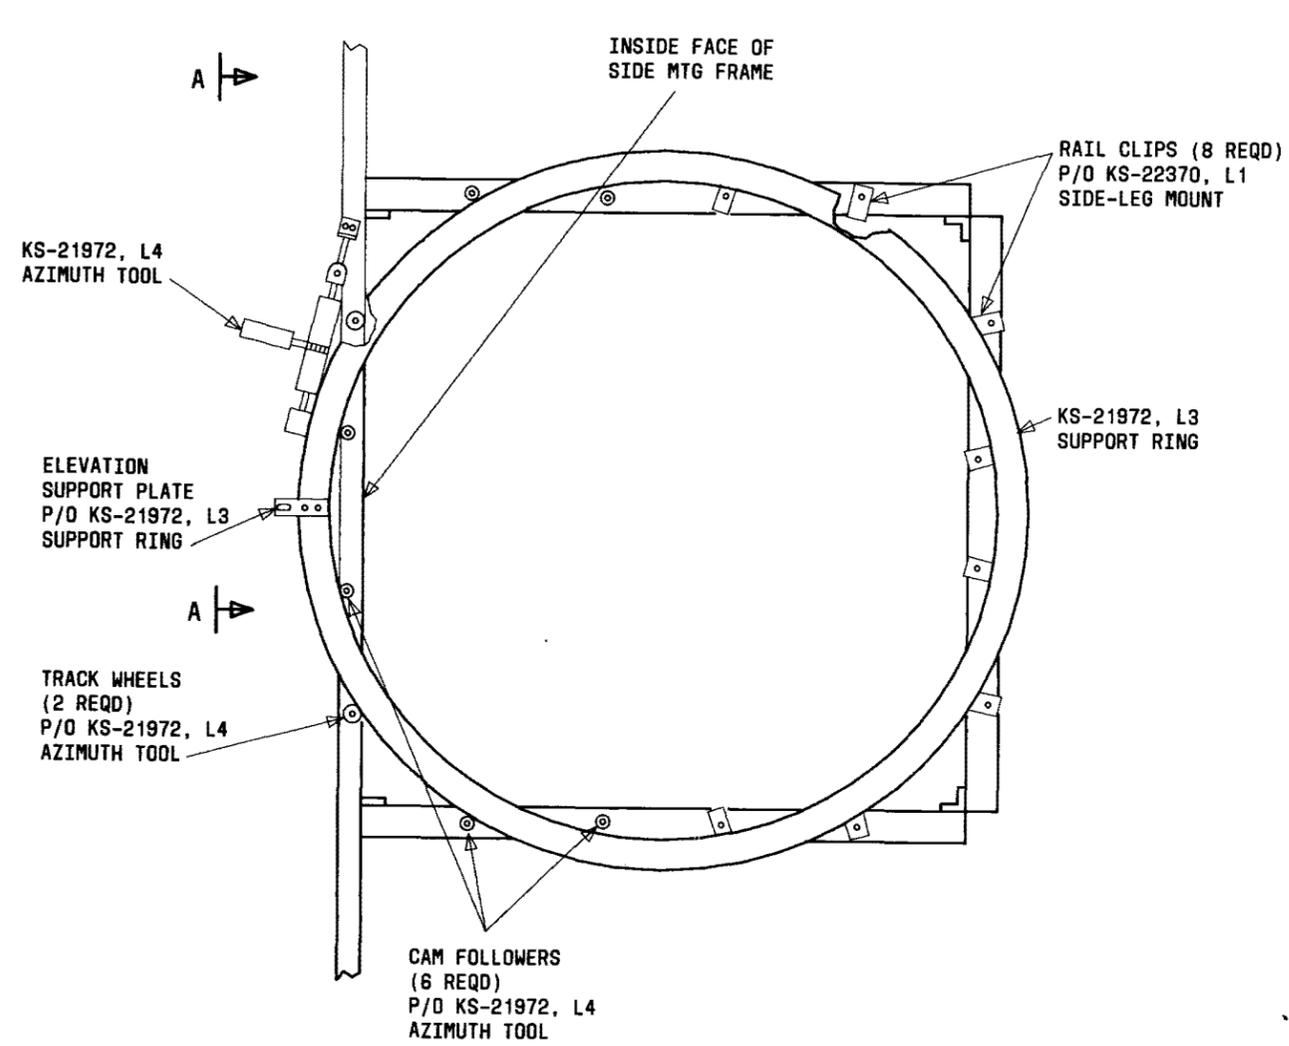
Assembly of the KS-21972, L4 Azimuth Tool to the L3 Support Ring and KS-22370 Side-Leg Mount
